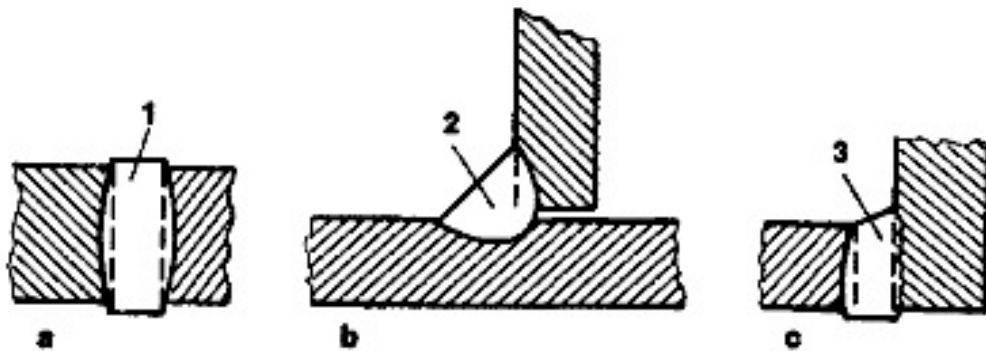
Types of welded joints and welds used in electro slag welding: (a) butt joint, (b) T-joint, (c) corner joint; (1) butt weld, (2) fillet weld, (3) weld for corner joint [70]
